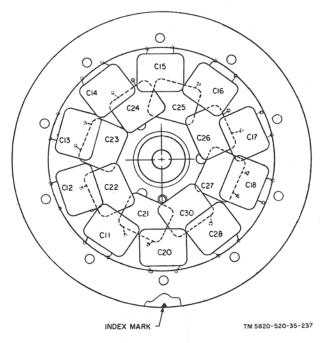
Rotor board assembly 1A12A30, parts location diagram.
